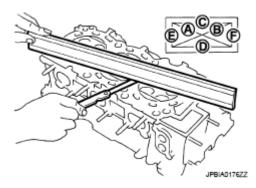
Measuring Cylinder Head Distortion Courtesy of NISSAN MOTOR CO., U.S.A.
